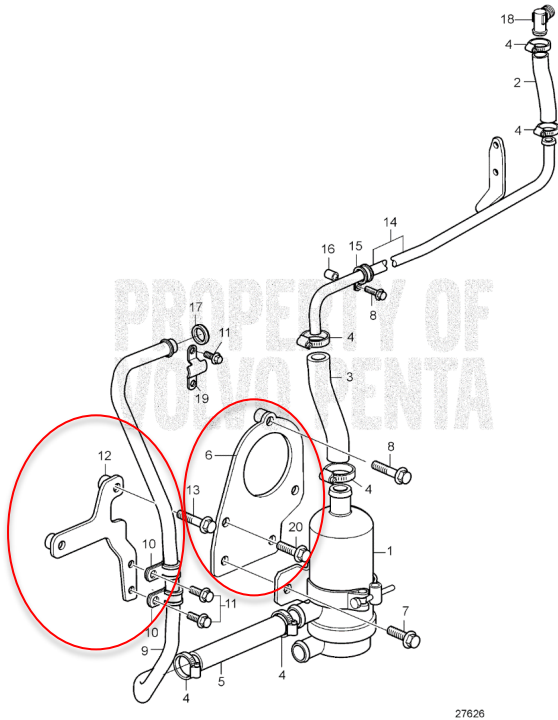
An assembly of an external engine heater for a Penta D12 engine. Parts 6 and 12 are brackets with spacers.
